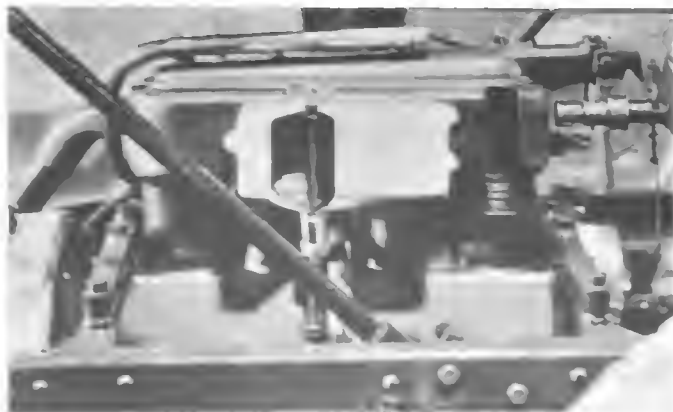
Everitt motor, showing block cylinders integral with the engine case.
